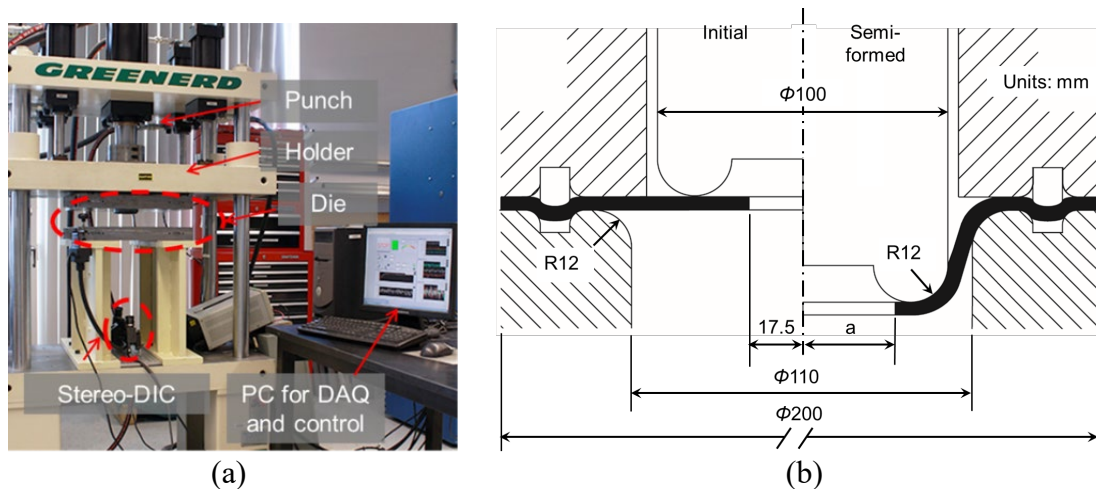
Experimental setup for hole expansion: (a) machine and equipment and (b) tools
